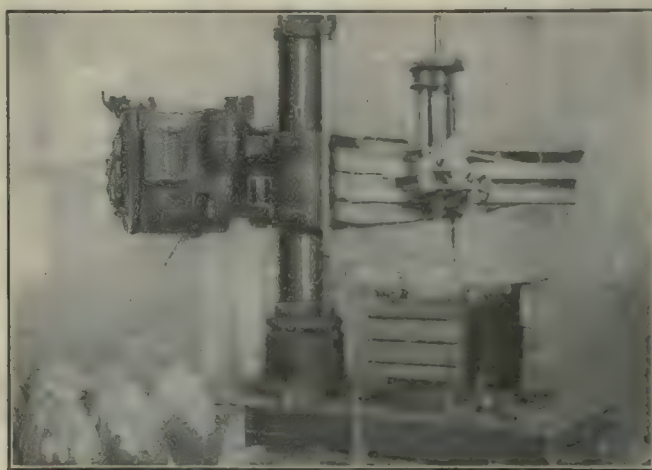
FRONT VIEW OF GEAR BOX OF RADIAL DRILLING MACHINE
